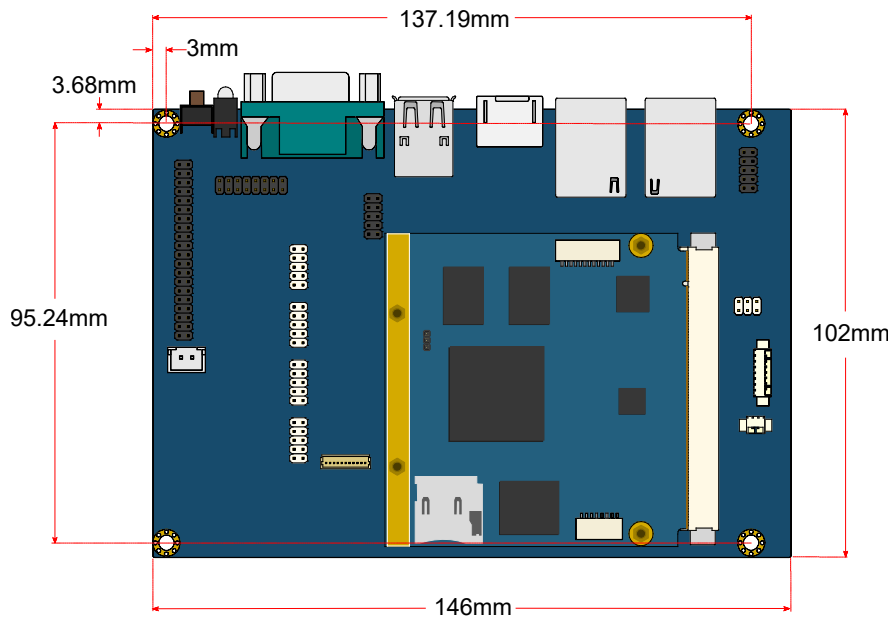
Dimensions of the VIA QSM-8Q60 attached to the carrier board (top view)
